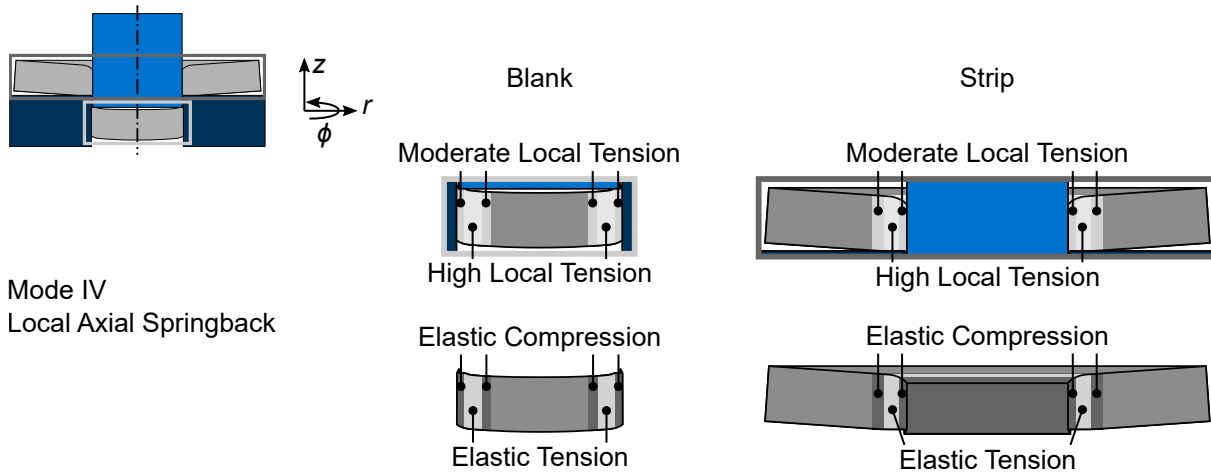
Springback mode in axial direction of parts produced by a rotation-symmetric closed cut without the formation of a fracture zone.
